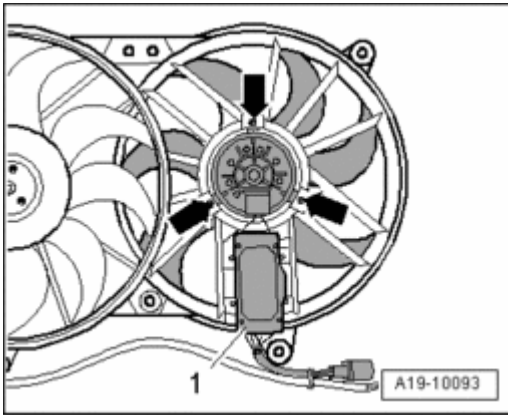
Removing Bolts, Unclipping Coolant Fan Control (FC) Control Module 2 J671 And Removing Coolant Fan And Coolant Fan Control Module
